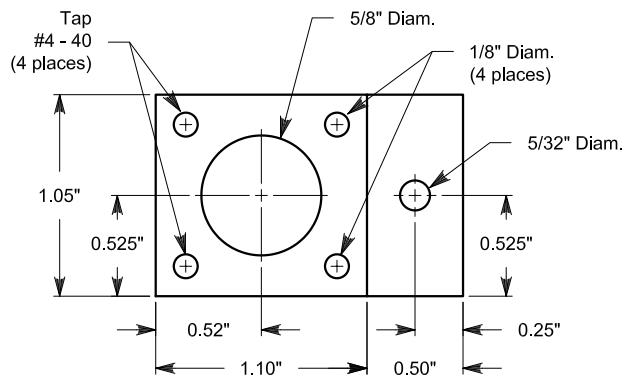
Mounting bracket dimensions (before bending). I recommend 50-mil thick 5052-H32 aluminum.
